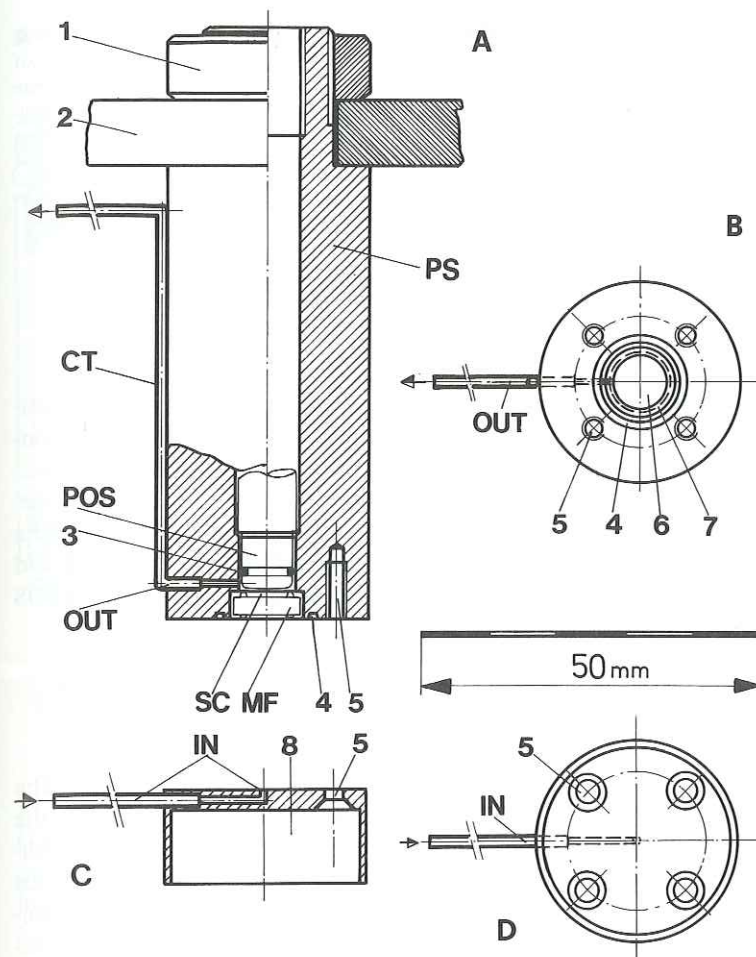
A–D. The stirring chamber. Cut view and cross-section of the POS sleeve (A, B) and the bottom assembly (C, D) respectively. 1 retaining nut, 2 Perspex mounting plate, 3 O-ring of the POS serving as a seal of the stirring chamber (SC), 4 O-ring groove for sealing the stirring chamber between POS sleeve and bottom assembly, 5 threaded hole for fixing the bottom assembly to the POS sleeve, 6 central bore of the POS sleeve, 7 stirrer guide, 8 drive magnet housing. Other symbols as in Figs. 1 and 2
